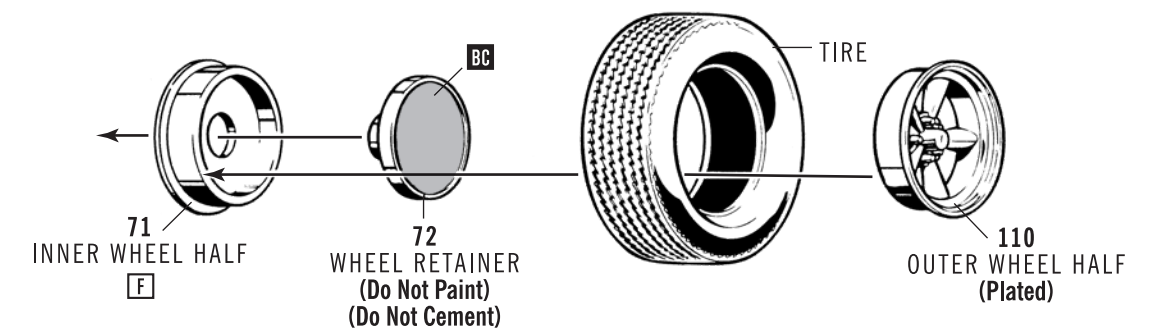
CUSTOM REAR WHEEL ASSEMBLY
